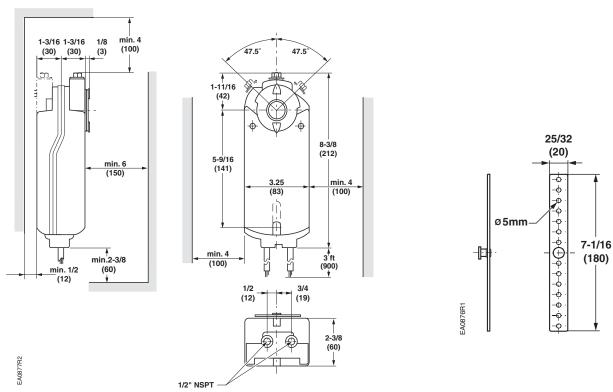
Dimensions of the TAC DuraDrive Actuator and Anti-rotation Bracket in Inches (Millimeters).
